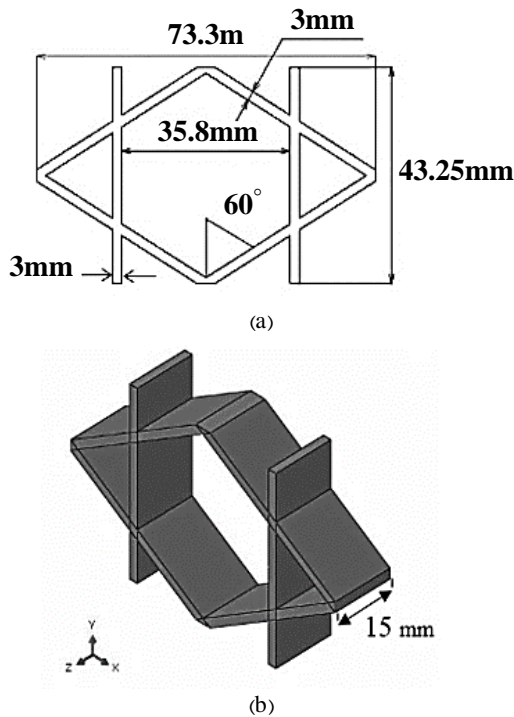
Geometric dimensions of the unit cells of the core panel; a) Front view; b) Isometric view
